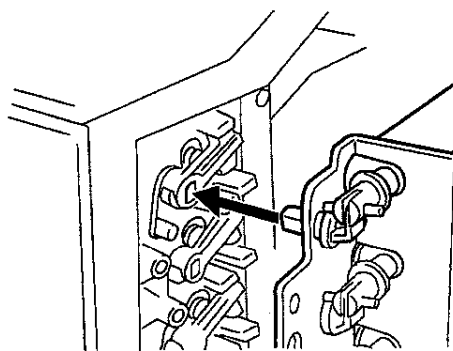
Removing the Link Solenoid Assembly
